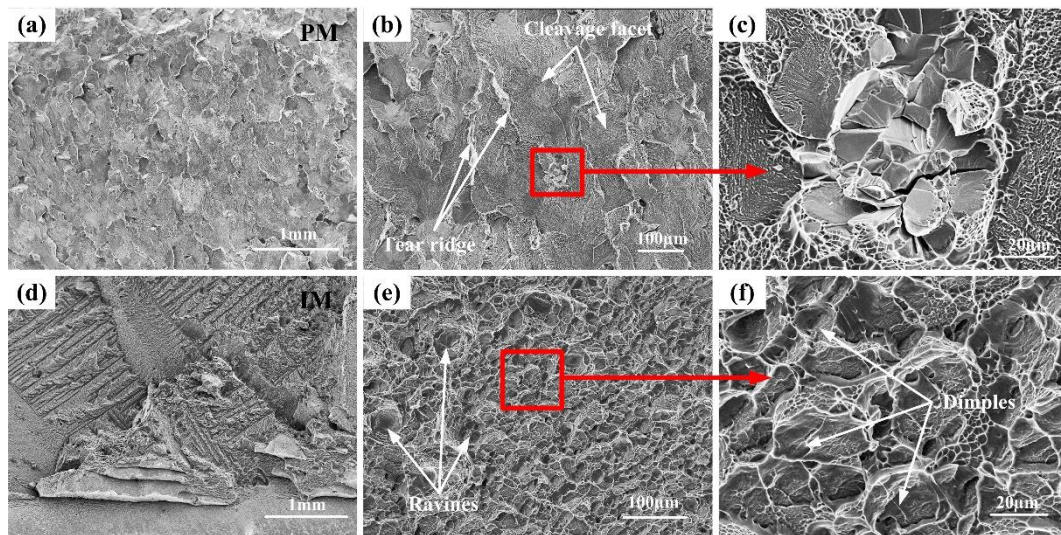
presents the fracture surfaces of the specimens of the PM and IM Ti-5553 alloys from fracture toughness tests at room temperature. First of all, similar to the macroscopic tensile fracture surfaces, flat and even crack surfaces can be seen in PM alloy fracture toughness specimen in Figure 3.7a. Large cleavage facets in conjunction with tear ridges and secondary cracks can be found in Figure 3.7b and Figure 3.7c, while Figure 3.7c also presents a number of small and irregular dimples arranged between flat cleavage facets. A lower energy consumption of PM alloy during the crack propagation and the cleavage dominated crack mechanism can be inferred and identified during the fracture toughness test of PM alloy.
